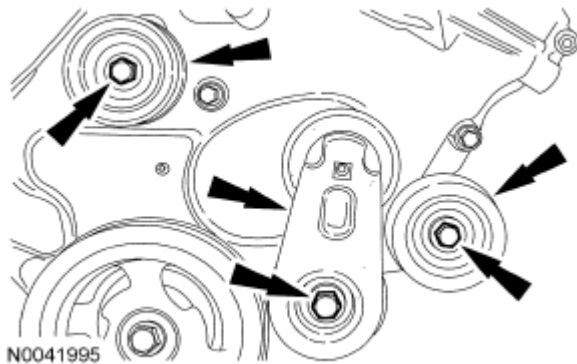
Locating Accessory Drive Belt Tensioner And Idler Pulleys
